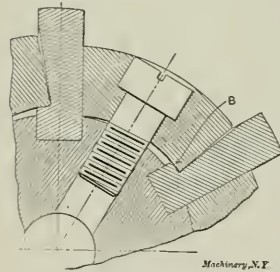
Enlarged Section of Reamer, showing Method of Binding.
